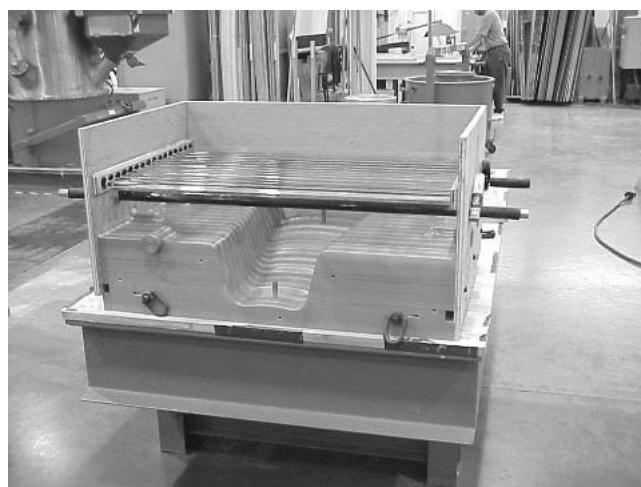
A ceramic die casting model boxed and ready to cast the raw material into a plywood encased mold.
